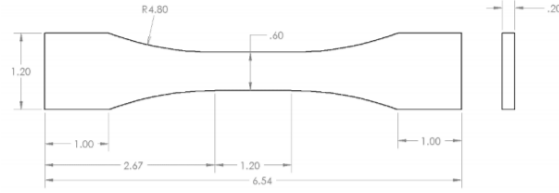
Nominal dimensions in inches of large fatigue specimens
